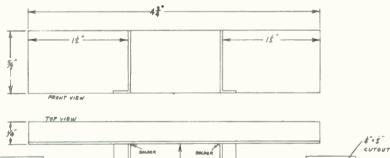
Detailed drawing of the tube and transformer mounting brackets.
